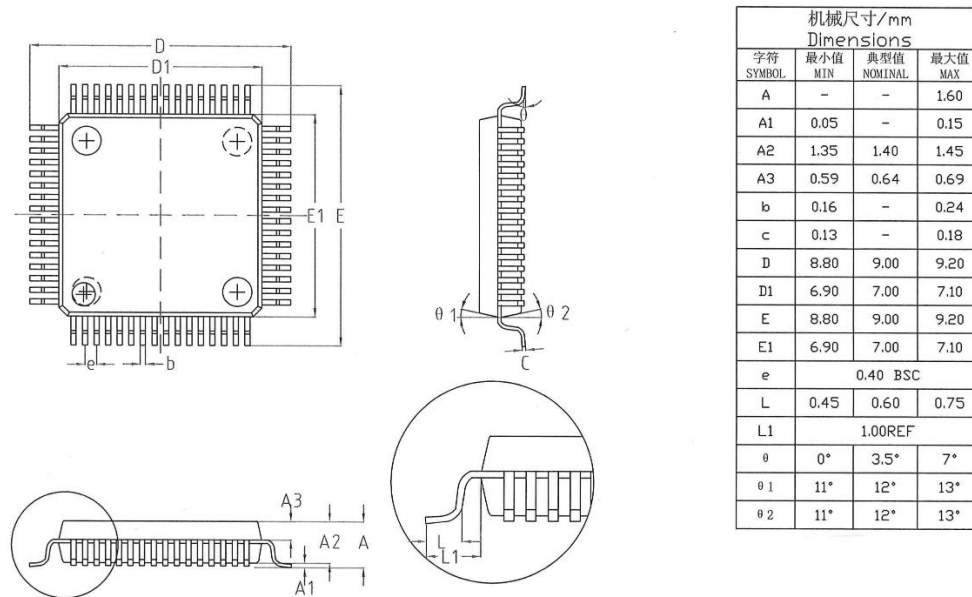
LQFP64 (7 \* 7 mm) Package Outline
